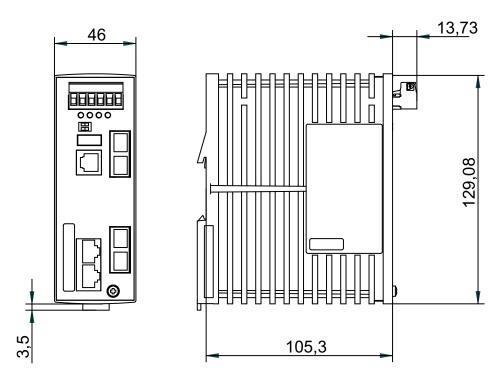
Dimensions of device variants RS20-04... with 4 ports
